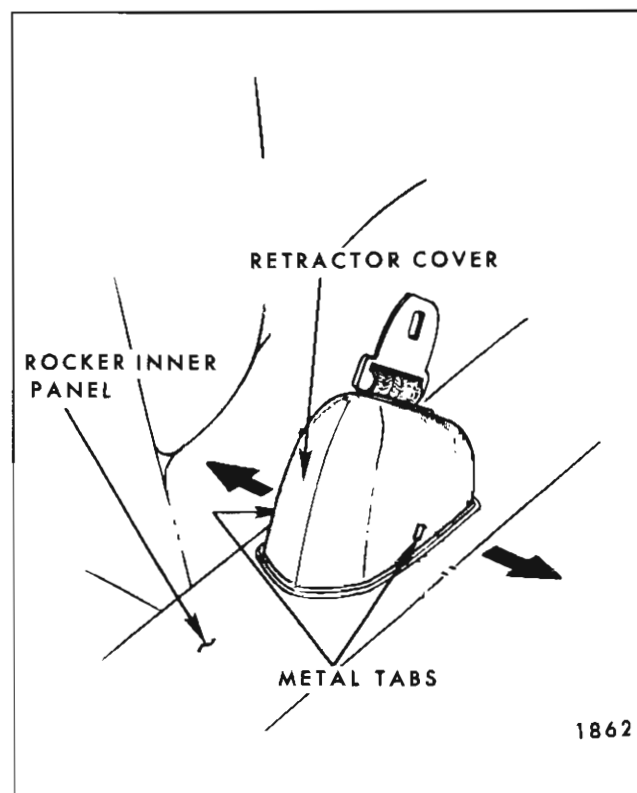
H41—Removal of Seat Belt Retractor Cover -
